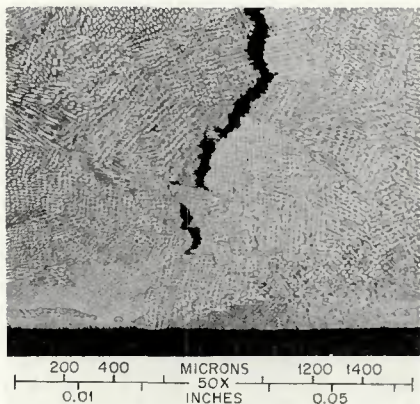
Hot cracking in Type 347 weld metal used to join alloy 800H to Type 316 stainless steel
